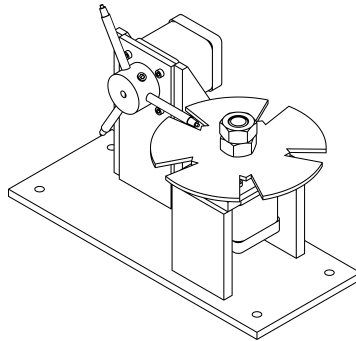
Technical drawing of the DS motor assembly [BSH20b]. (©2020 IEEE)
